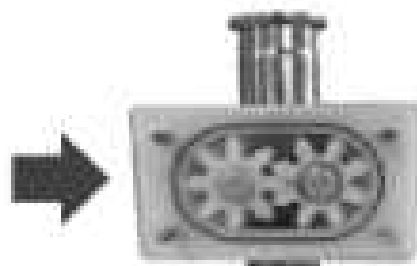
Remove the cover of rotor (Step 2)
